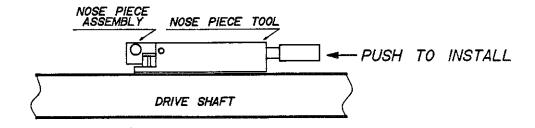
INSTALLING THE NOSE PIECE ASSEMBLY
